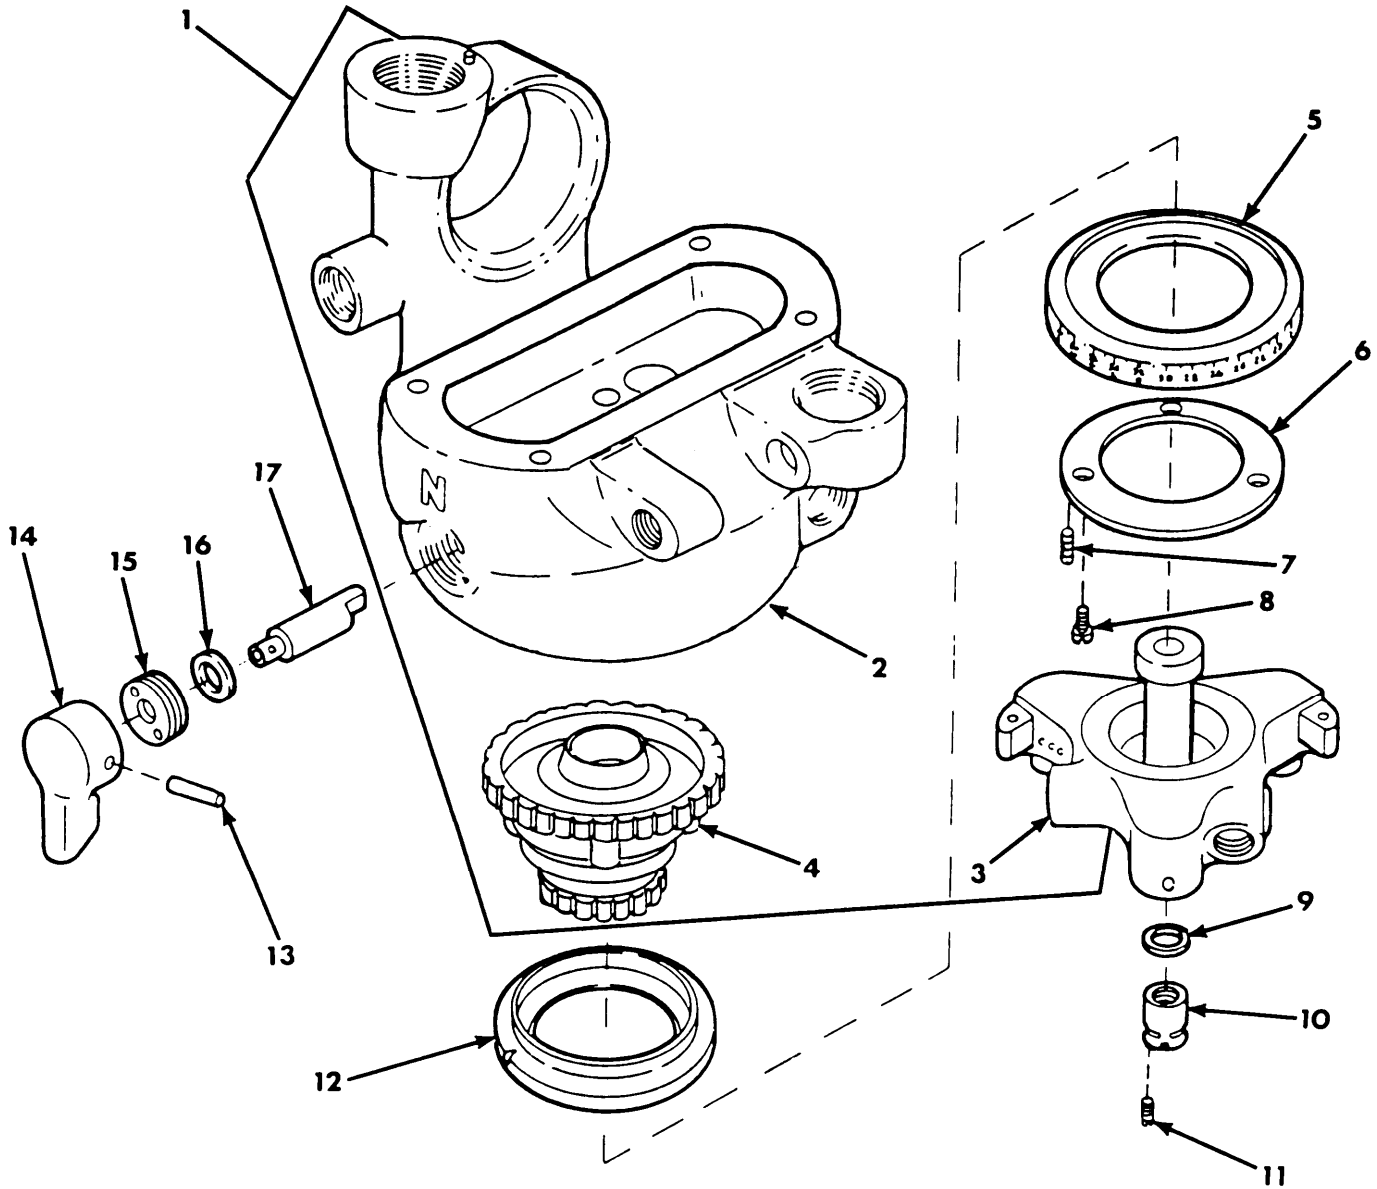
Aiming Circle, M2A2 (Locking, Azimuth Gear, and Housing Parts) 11834483 and Body Assembly 8211717.
